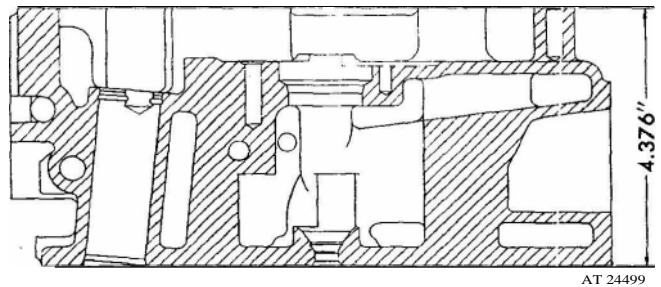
Minimum distance between top and bottom faces of cylinder head.
